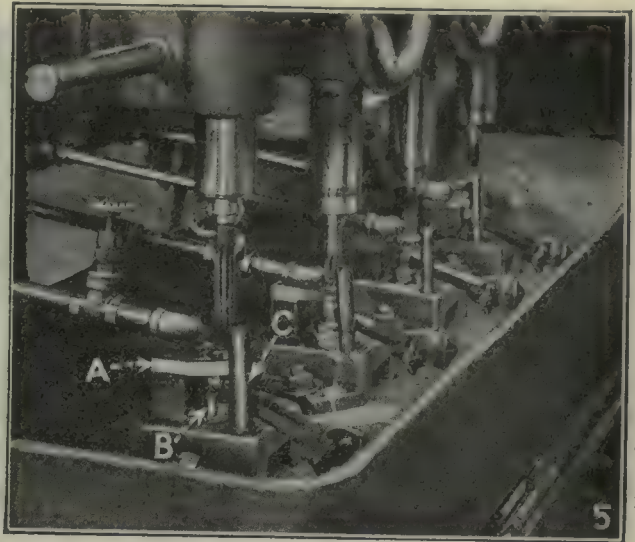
ROUGH-REAMING PISTON-PIN HOLE
